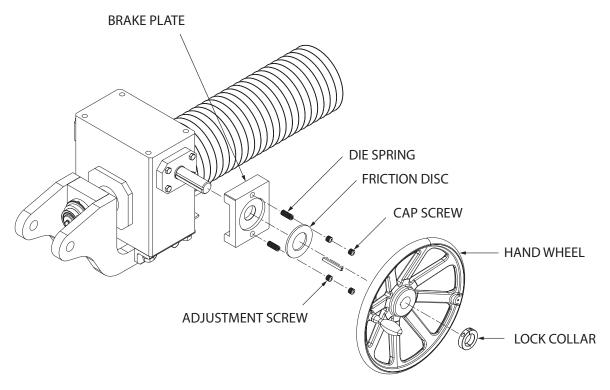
AGSE-E16626-S01 Cradle Jack Assembly
